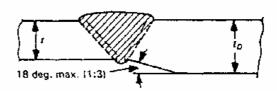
BEVEL FOR OUTSIDE THICKNESS 1-3
